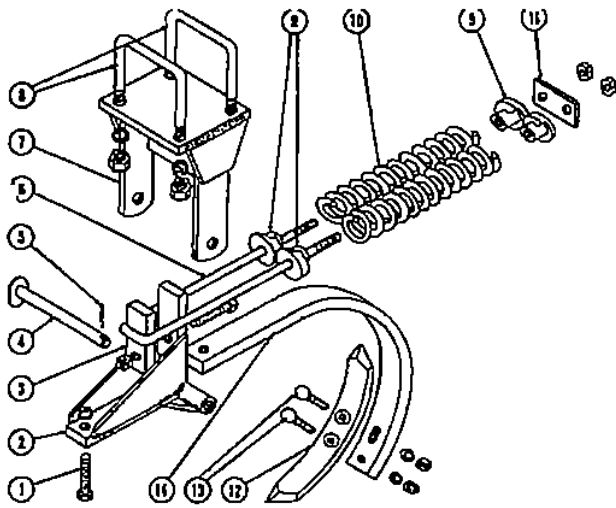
BALK BREAKER ATTACHMENT — MACH. NO. 299049
